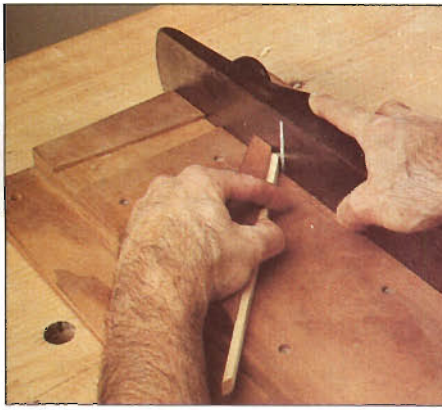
Photo R: Miter the glass fillets to fit the door rabbet. Author uses a hand plane and shooting board to miter the fillet ends.
